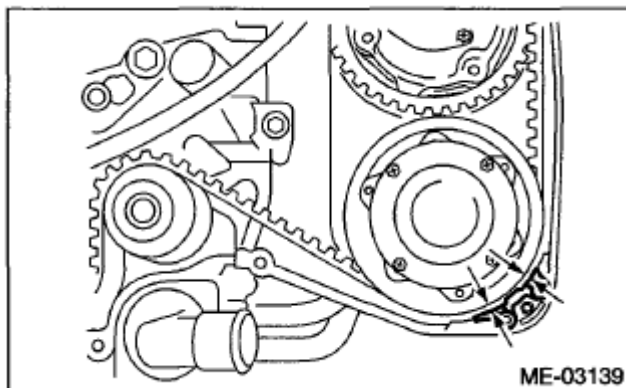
Adjusting Clearance Between Timing Belt And Timing Belt Guide Using Thickness Gauge (3 Of 5)
